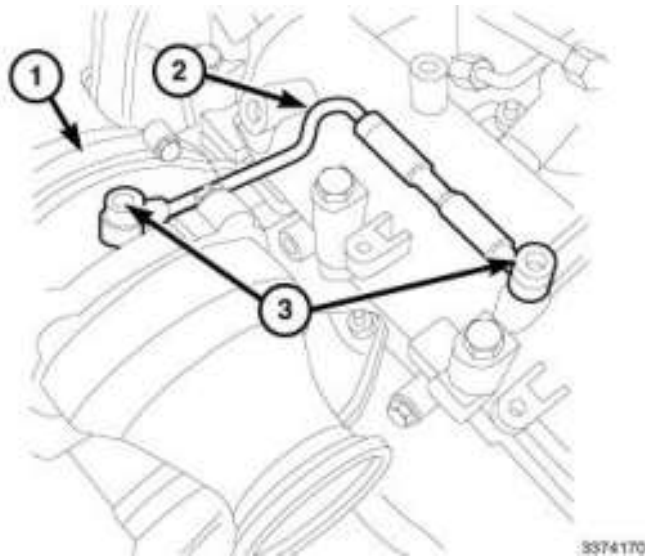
Turbocharger, Oil Feed Line & Banjo Bolts
